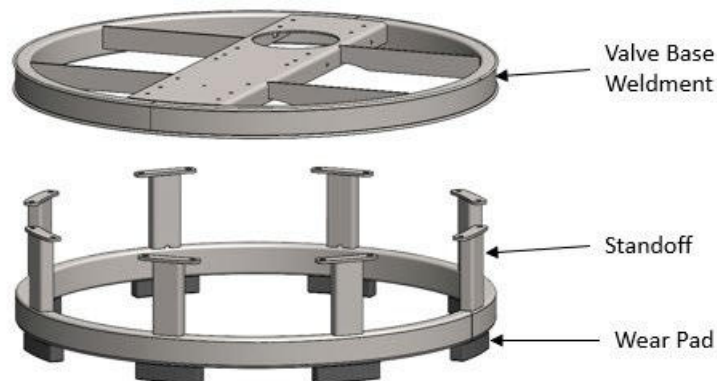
Valve Base Weldment, Standoff, and Wear Pads
